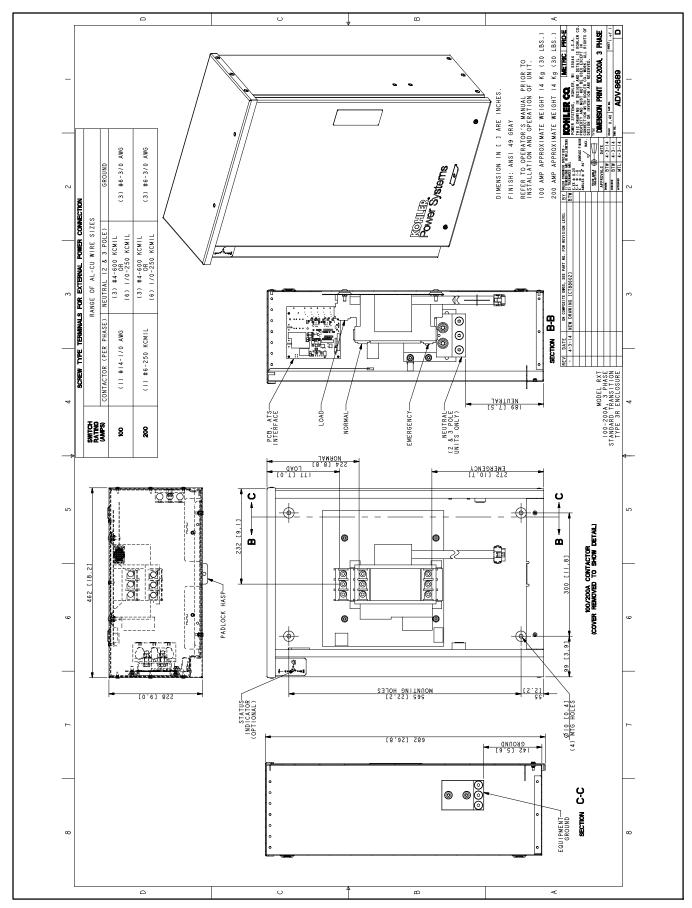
Enclosure Dimensions, 100-200 Amp Three-Phase, 3- and 4-Pole, ADV-8689
